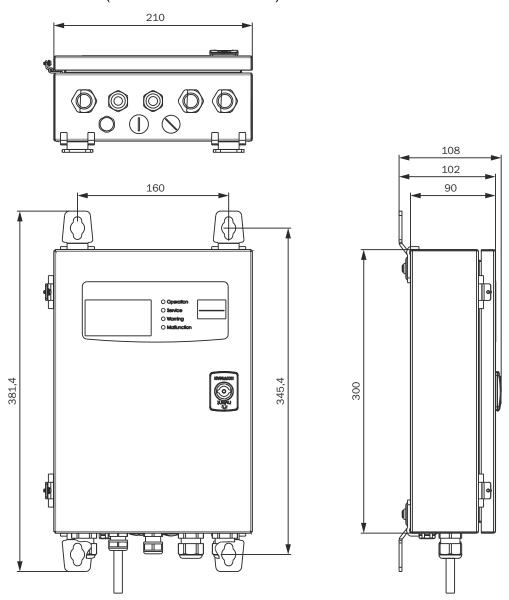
Control unit AWE (sheet steel enclosure version), dimensions in mm
